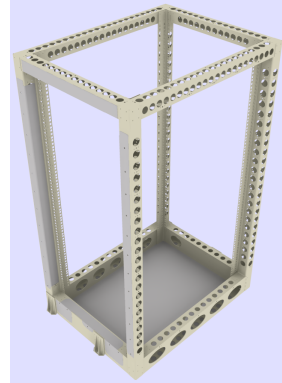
3D CAD drawing of a 19 inch Rack for mounting instruments, developed by Zeppelin Luftschifftechnik GmbH.
